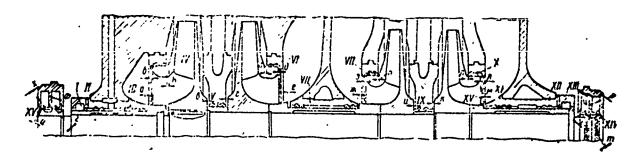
Clearances between rotor and hull of the turbocompressor and clearances in the labyrinths.
